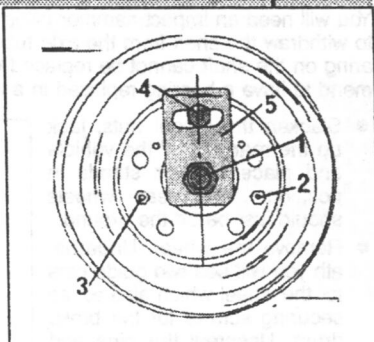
Fitted gauge to adjust the wheel bearing clearance.
